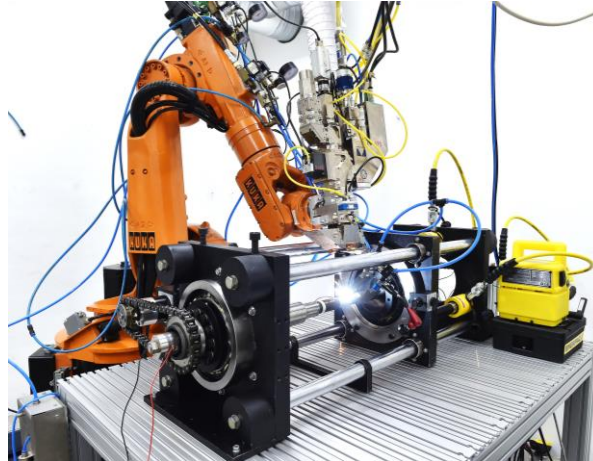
Experimental setup for the ultrasound assisted laser beam welding (source: LZH)
